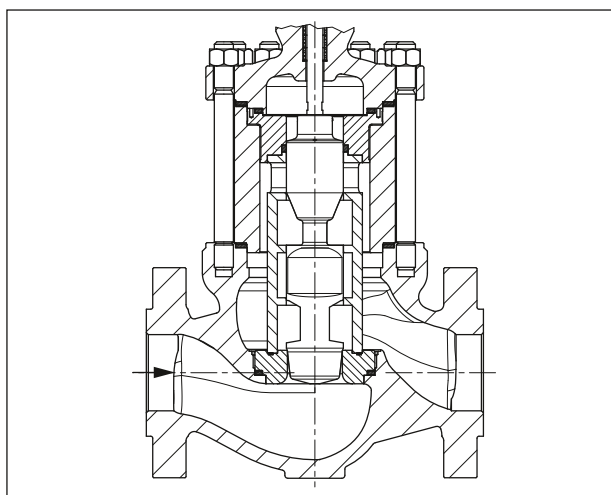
Type 261GR Globe Valve with 4-stage CDST plug
